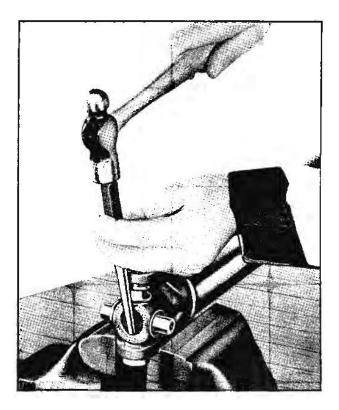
A-6 Removing Bearing From Fixed Yoke Member
